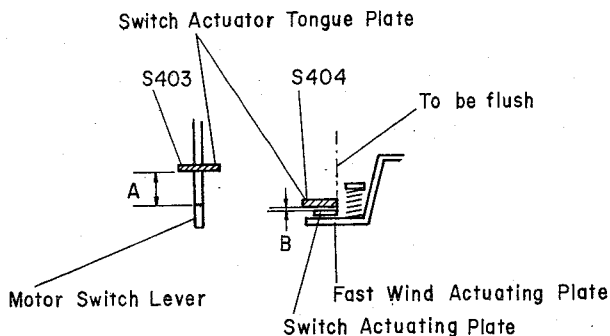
MUTING and MOTOR Switch Adjustments
